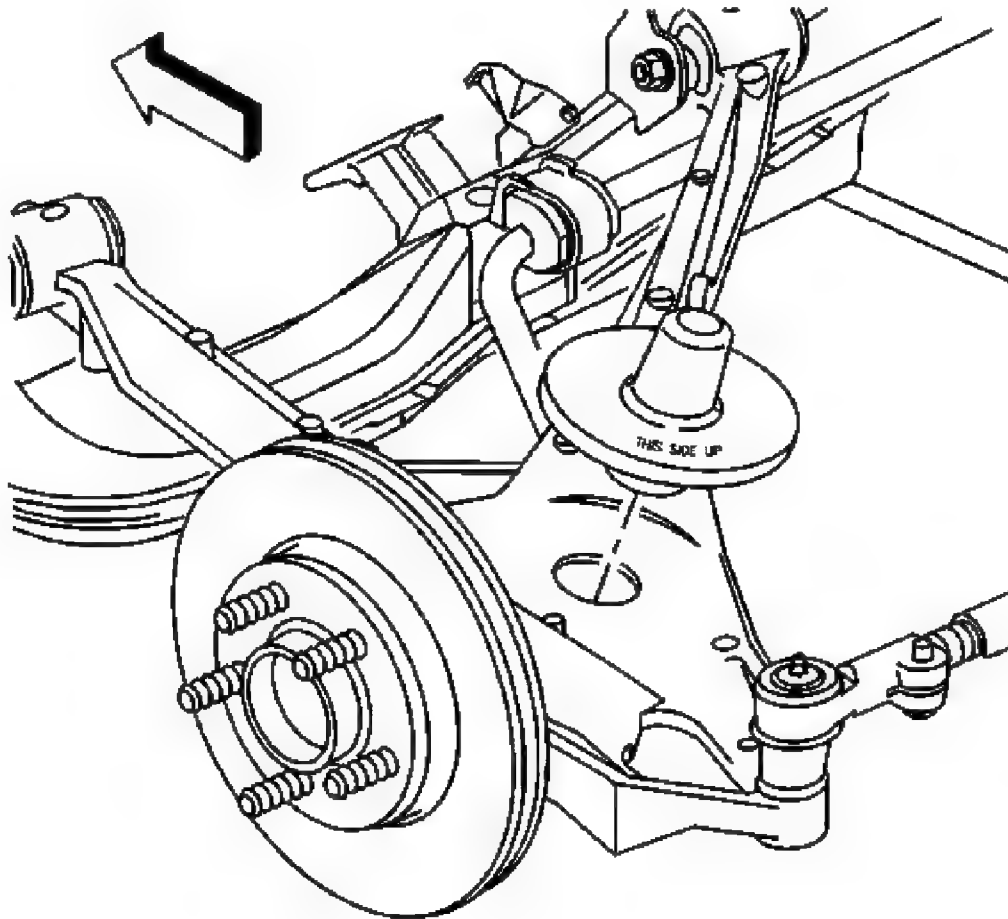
Installing Shock Absorber Control Arm Lower Insulator
